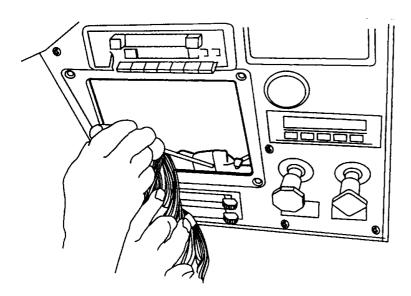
With Switch Panel Removed, Access Control Cable Adjuster
